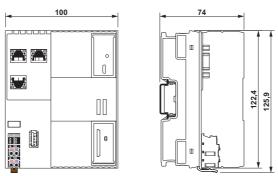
Nominal dimensions of a class 3000 AXC controller housing (type AXC 3, e.g., AXC 3050, AXC 3051)
